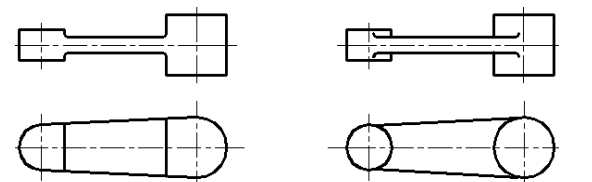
Shaping of the forging with intersection of cylindrical and prismatic surfaces: desirable (on the left) and undesirable (on the right)
